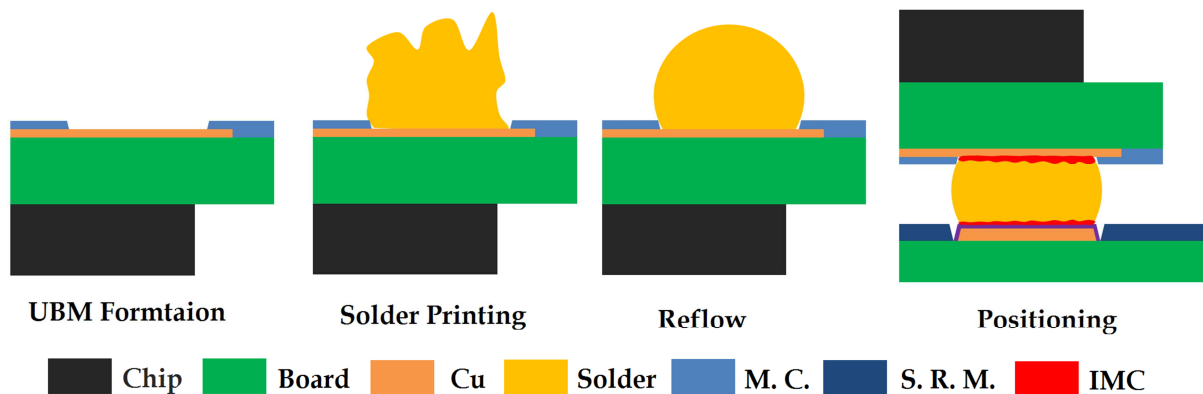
Visualization of BGA processing with solder printing and BGA contacting with reflow
